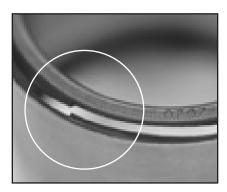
This drawn cup needle bearing was installed with an improper tool, damaging the lip. Lip damage this severe may lock up the bearing.
